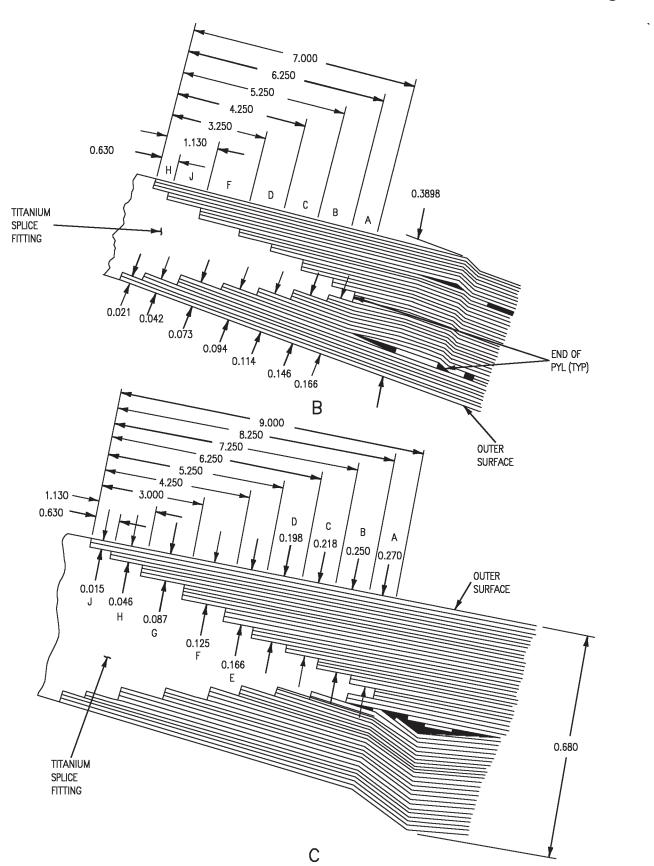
Inner Wing Lower Surface Titanium Splice Fitting Inspection Areas (Sheet 3)
